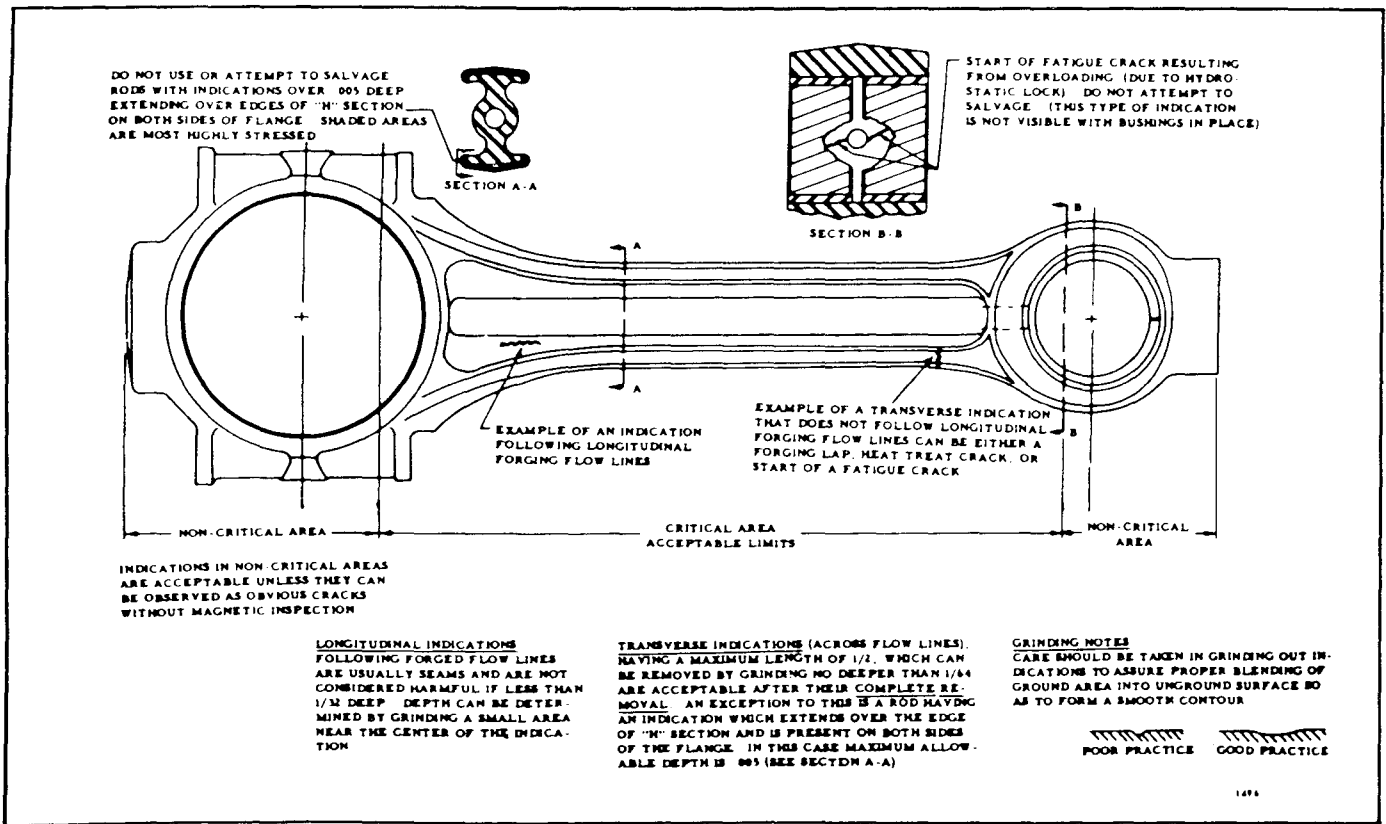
Magnetic Particle Inspection Limits for Connecting Rod
